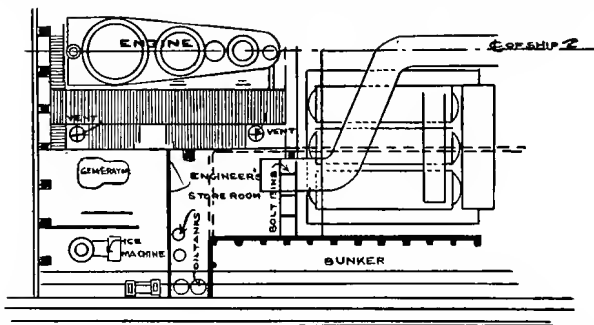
Plan View at Dynamo Flat and Engineer's Store Room.
